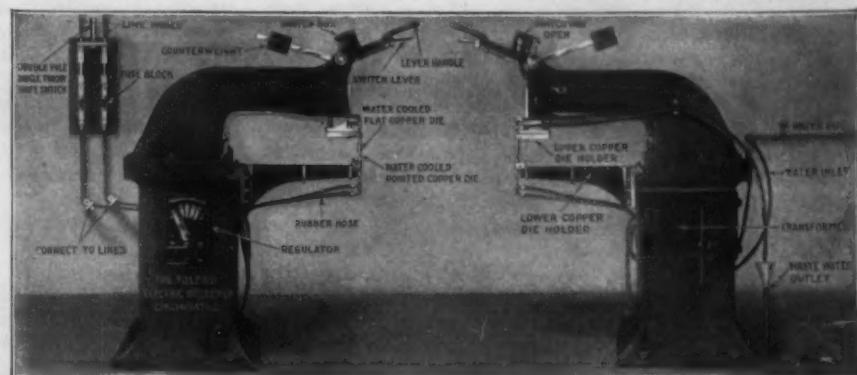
Diagram Showing Different Parts of Toledo Electric Welder.
